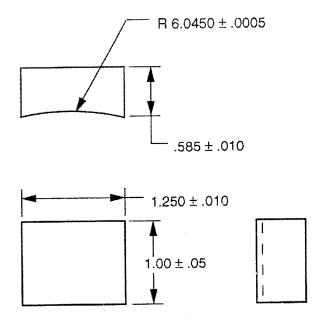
Upper concave inspection fixture pressure pad.
